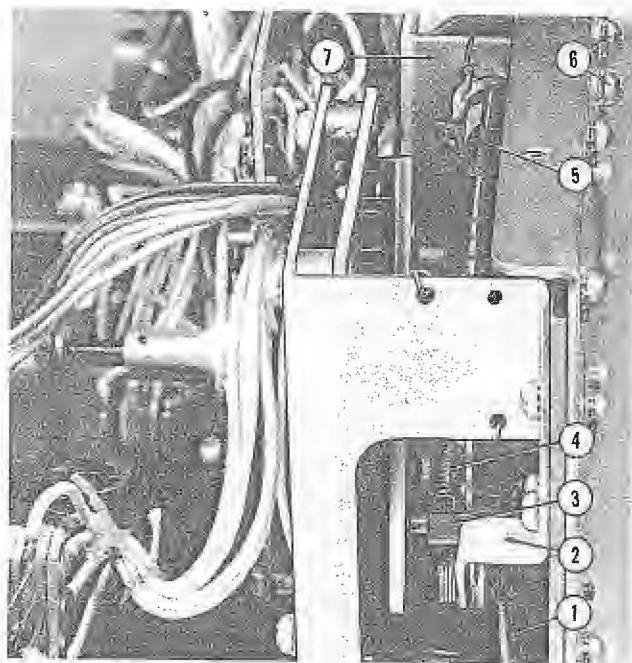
CANCEL SOLENOID ADJUSTMENT
